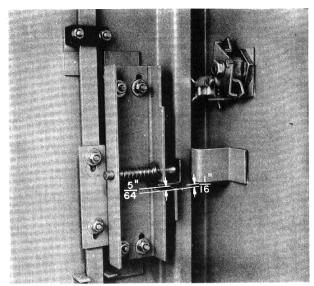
Close-up view of "door forgetter" interlock adjustment
